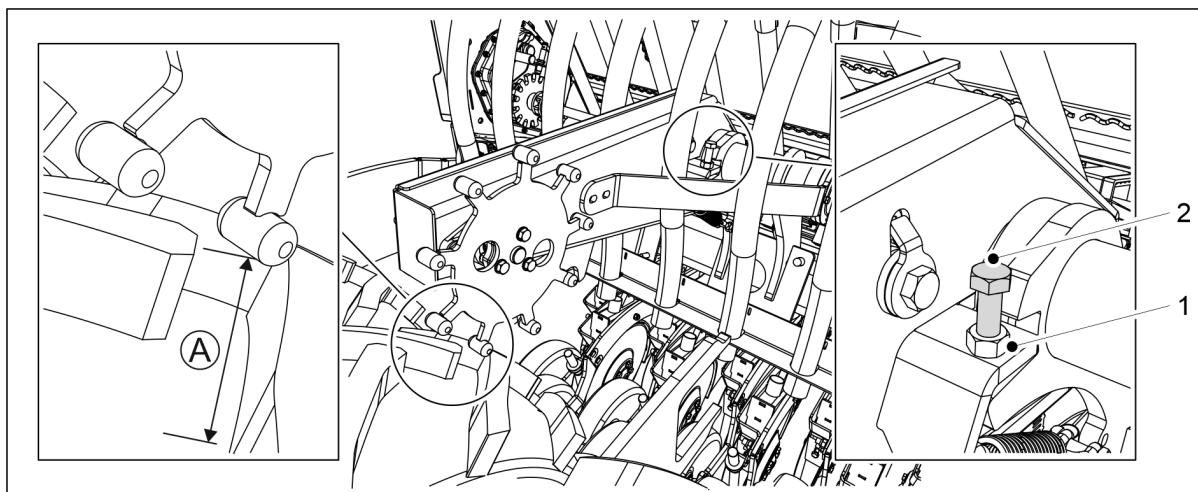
230. Inspecting the wheel drive clutch
